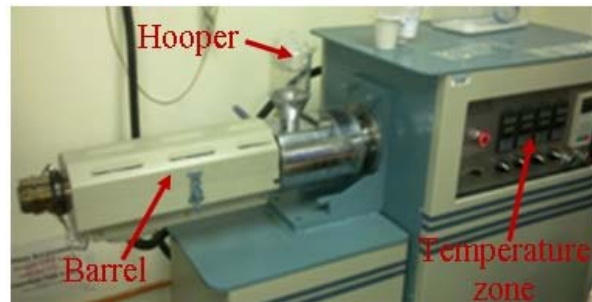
Single screw extruder machine for ABS-copper filament wire fabrication.
